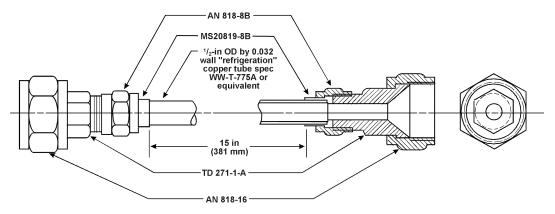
Btu Heat Transfer Device—Test Specimen
